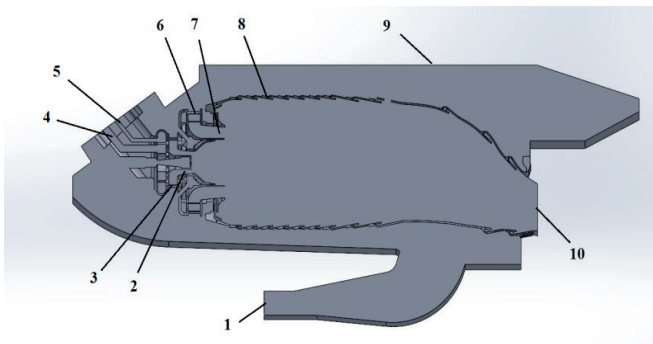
Longitudinal section of the combustion chamber: 1 – compressed air inlet; 2, 7 – sectors for supplying liquid fuel into the swirlers; 3, 6 – inner and outer radial-axial swirlers; 4, 5 – first and second gaseous fuel channels; 8 – flame tube; 9 – casing; 10 – outlet
